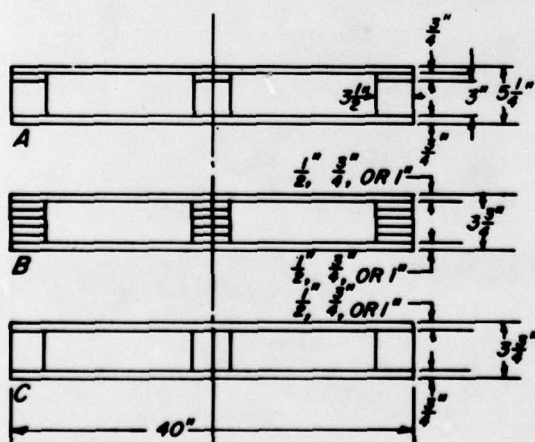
Front views and dimensions of pallets indicated in figure 1.
